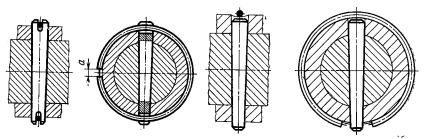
Taper pin locked with round retaining ring inserted into the pin end slots
